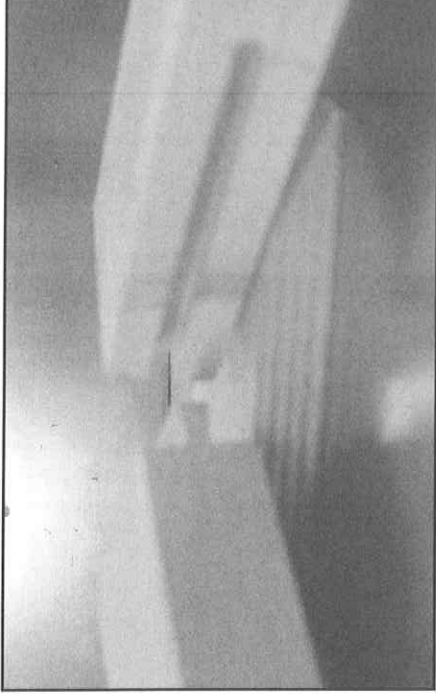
Sliding dovetail joint made with RouterShop.
